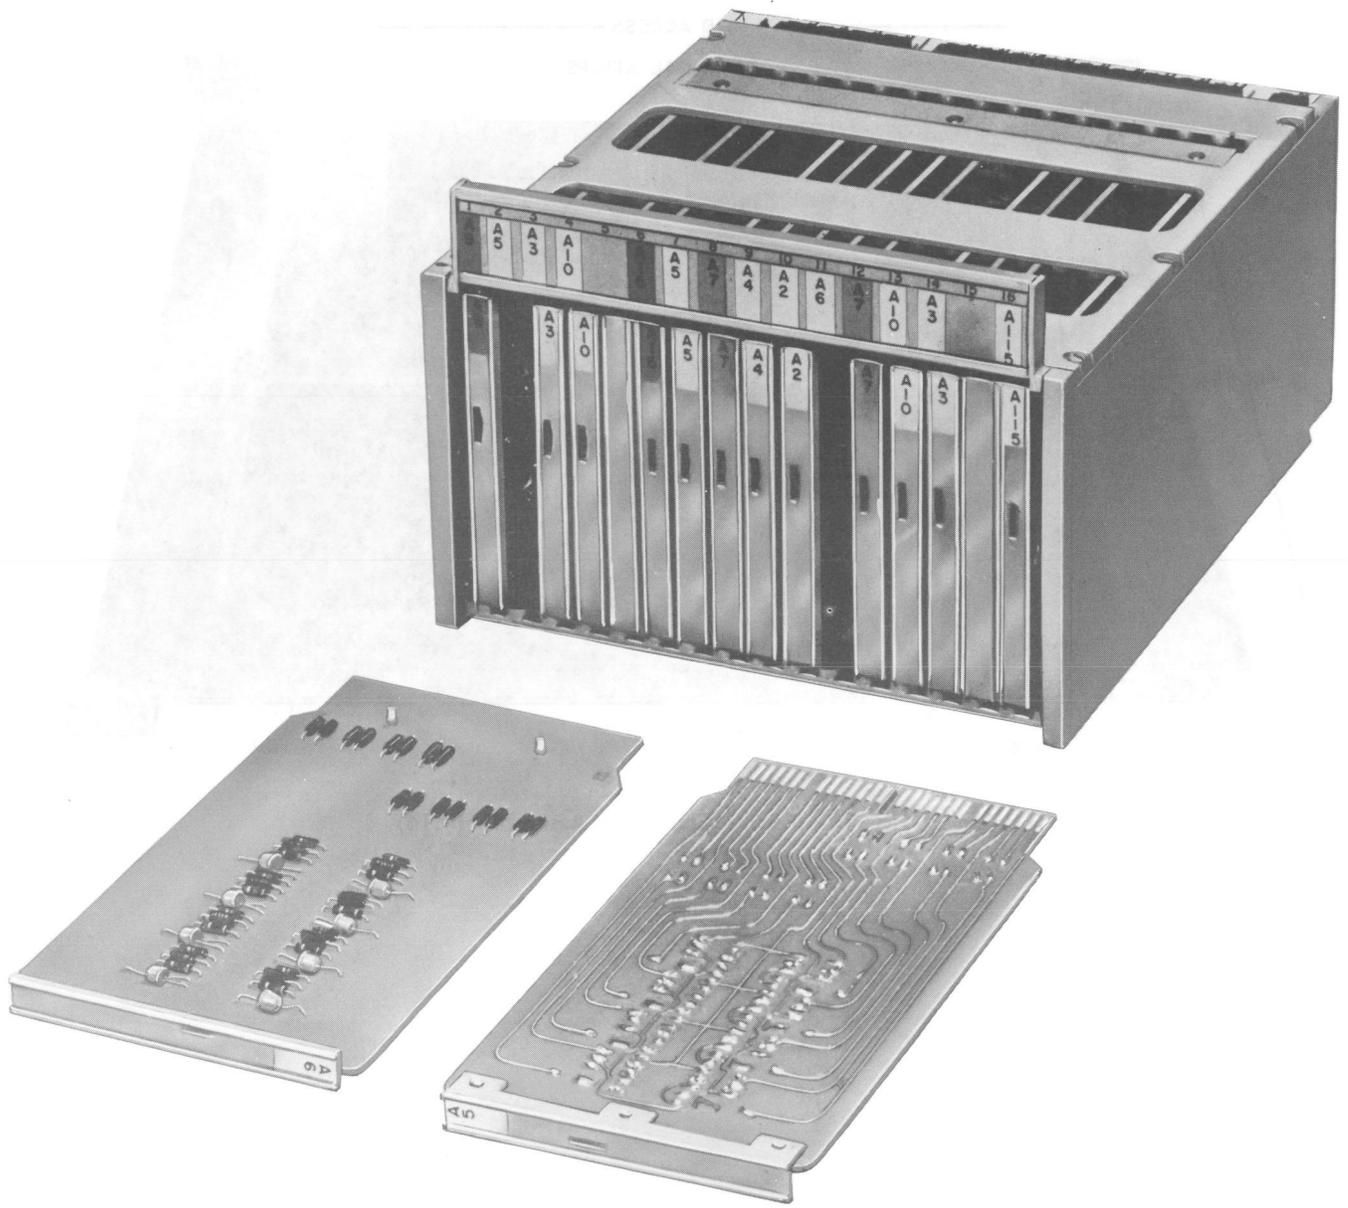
Circuit Packs and Apparatus Mounting (4.16)
